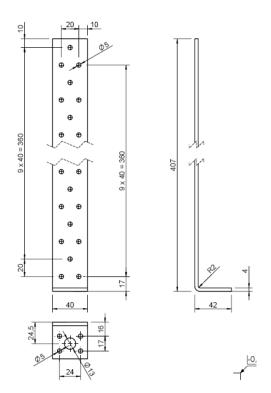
Dimensions of Timber-concrete steel anchor 40 x 300 x 4.00
